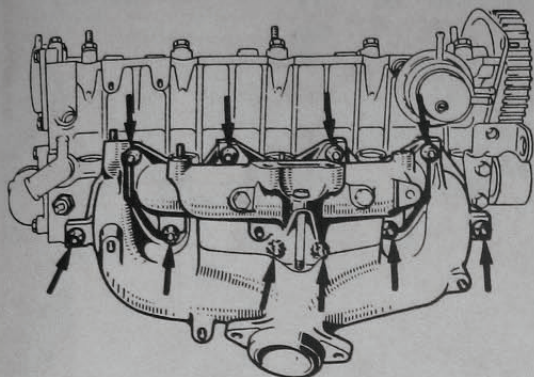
Inlet and exhaust manifold retaining nut locations (arrowed) - 1721 cc engines (Sec 18)
